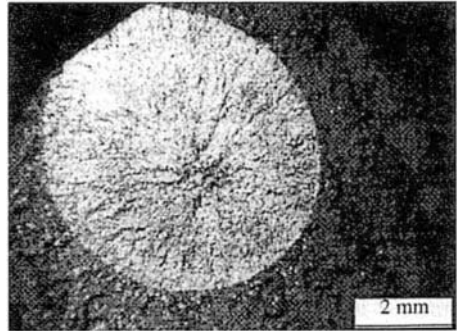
Subsurface fatigue crack initiation in the SG cast iron, $S_{max} = 210$ MPa, R = -1, $N_f = 6.71 \times 10^7$ cycles. The diameter of the specimen was 10 mm, while the clear section shown in this picture is 6 mm.
